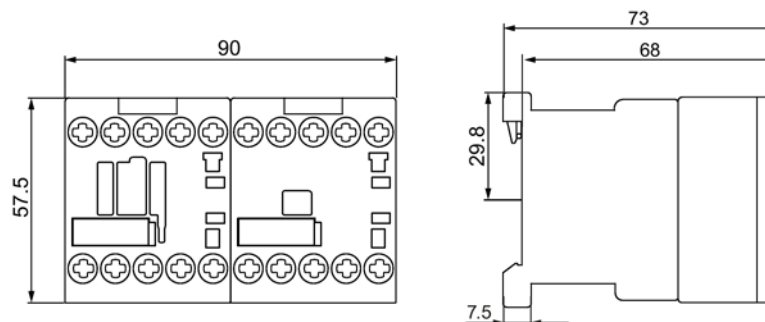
Latched 4-pole contactor relay 3RH24..-1 (screw-type connection system)
